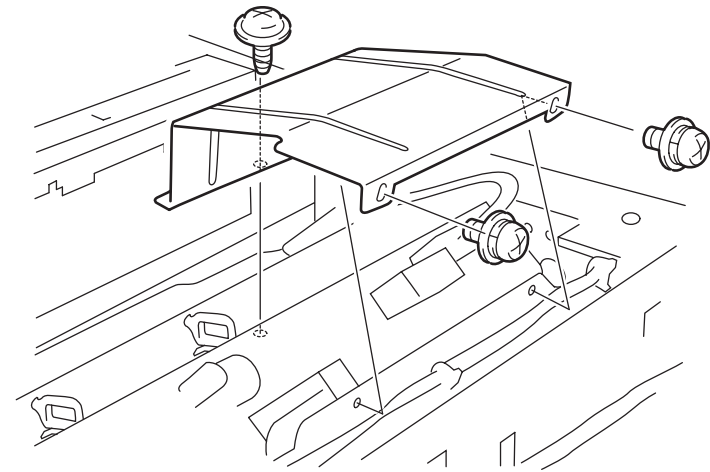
Protection Cover (Power Supply Unit) Removal
